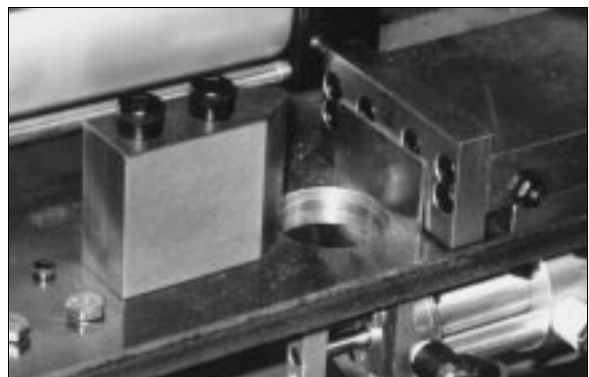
Anvil and square chuck, which deform the bearing outer ring during bearing assembly.
